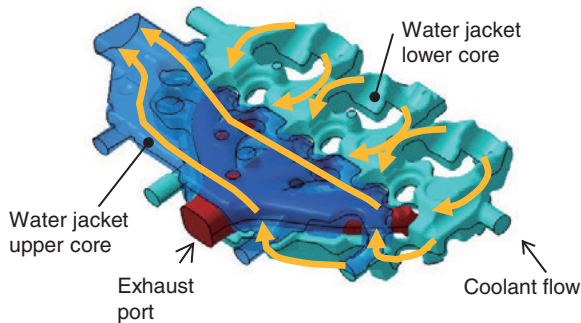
Configuration of two-piece water jacket and coolant flow in cylinder head
